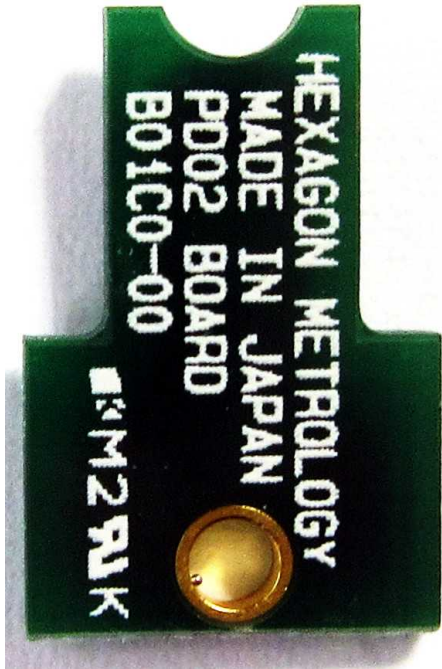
DS-SENSOR-B01C0-00_PCB_Photo_SolderSIDE
